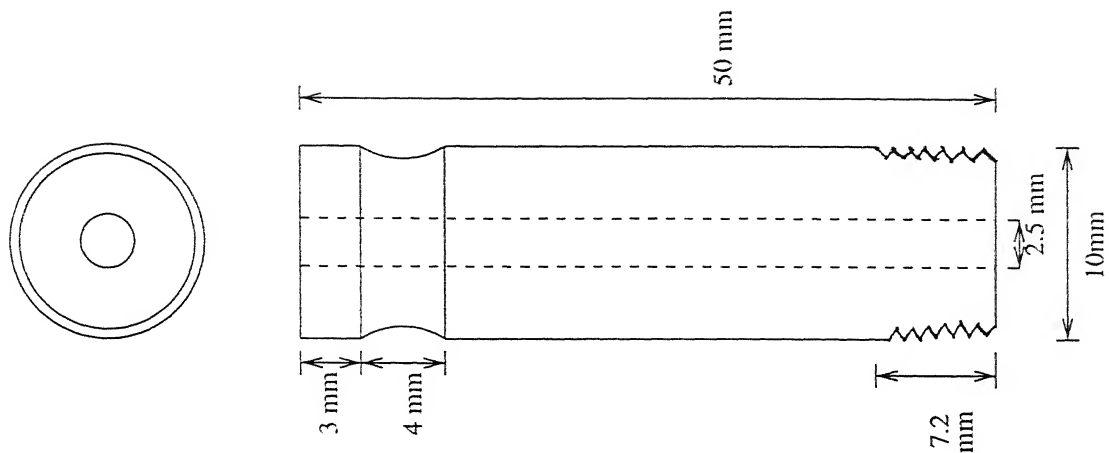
Threaded teflon rod to hold sample holder
